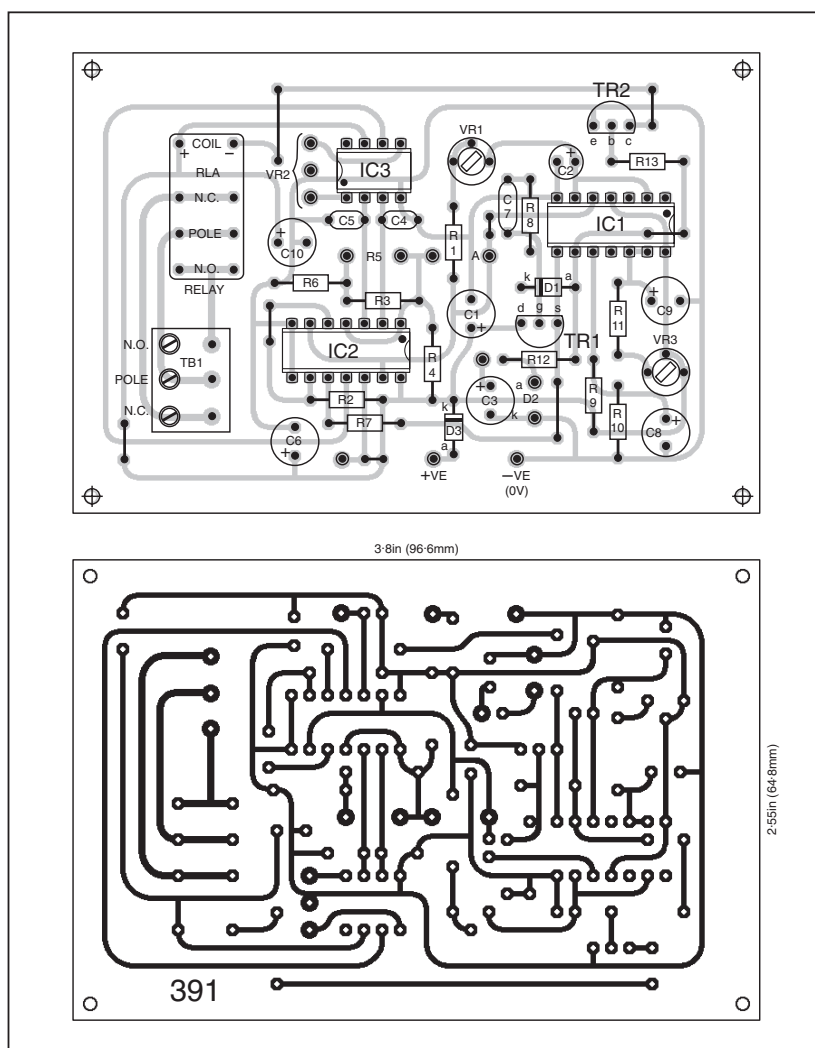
Printed circuit board topside component layout and full-size underside copper foil master pattern for the Super Motion Sensor.
